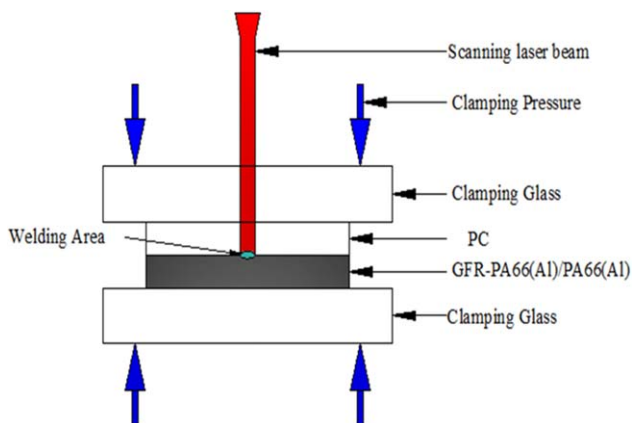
The schematic diagram of laser transmission welding GFR-PA66/PC. [Color figure can be viewed in the online issue, which is available at wileyonlinelibrary.com.]
